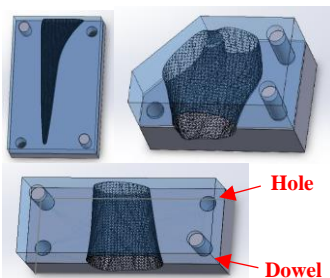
3D printed fixtures (clockwise: 125 mm Exeter® Short Stem, Proximal end, Distal End).
